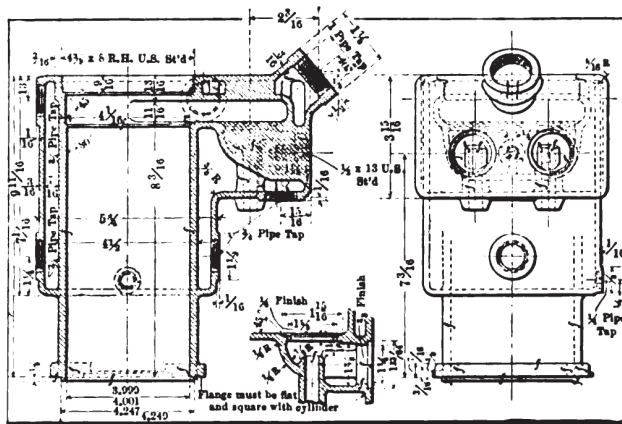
Cylinder of gray iron, with screwed in head, bevel seat to make it tight, and valves at one side
